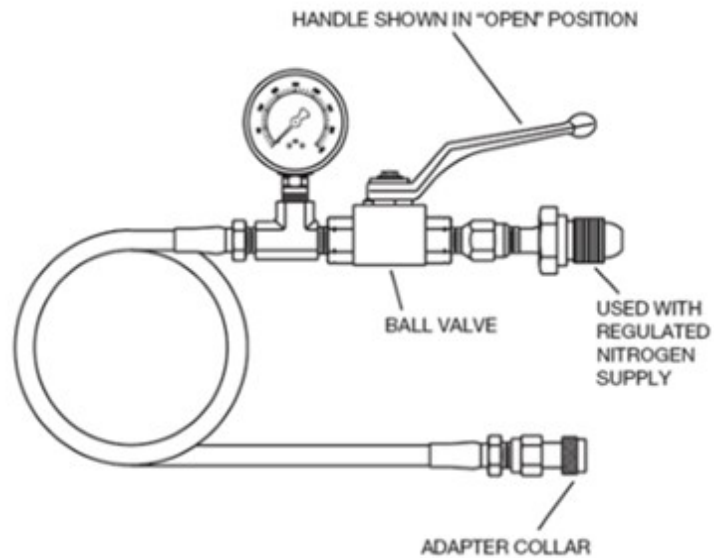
FILLING AND GAUGING ASSEMBLY
